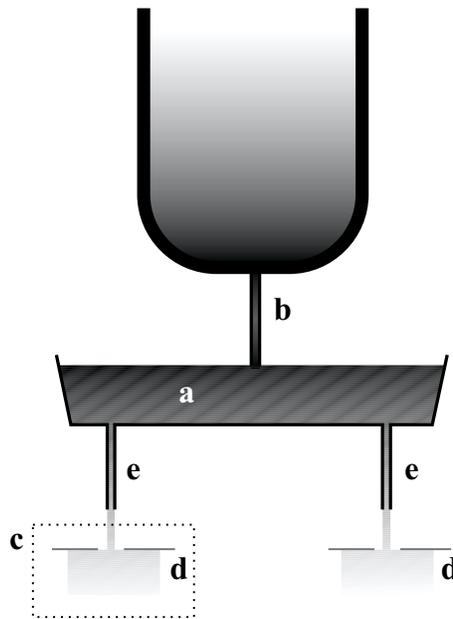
Schematic presentation (front view) of the casting machine. a) tundish; b) submerged entry nozzle; c) mould; d) slabs; e) outlets of the tundish.
